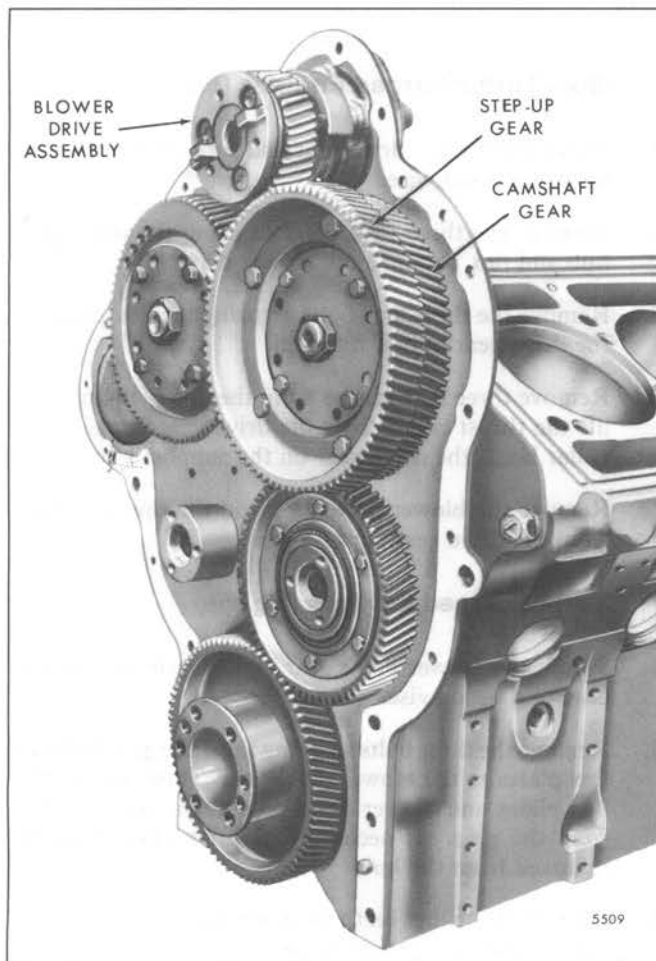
Blower Drive Gear Mounting (Non-Turbocharged Engine)
